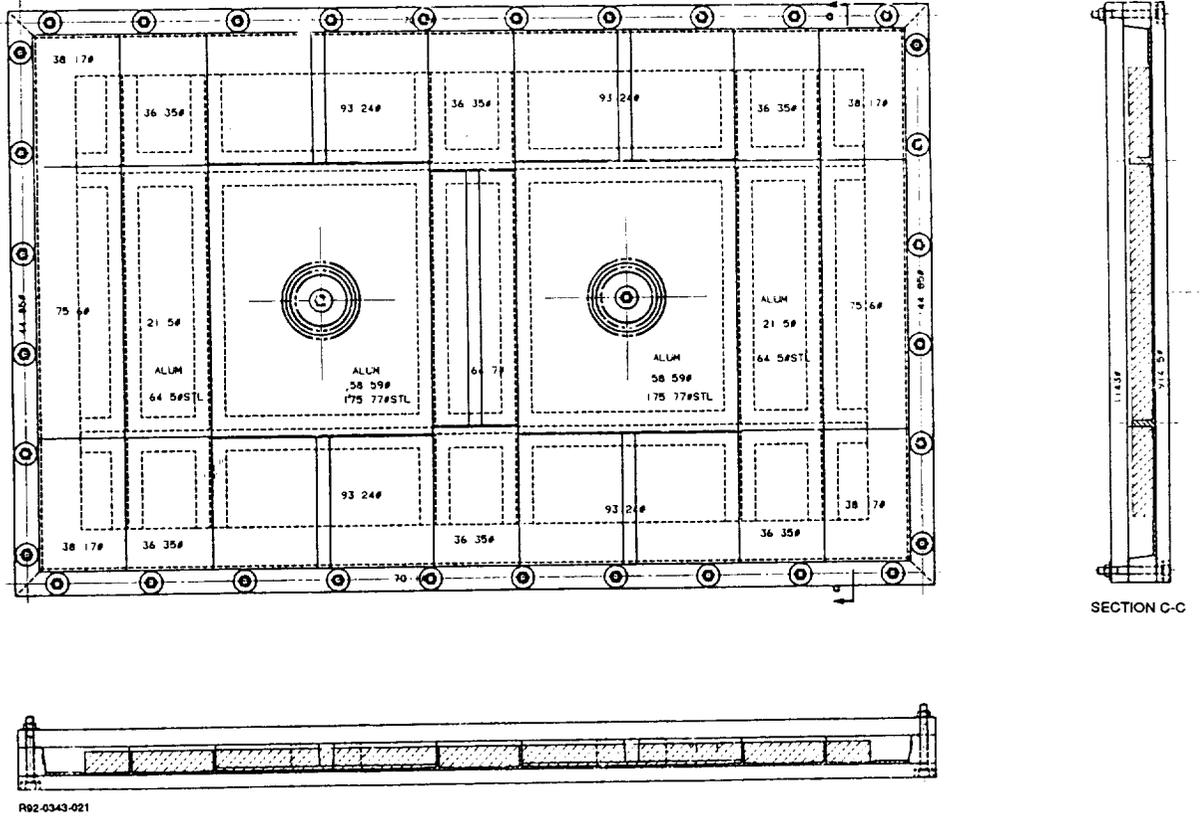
Tooling design concept, window belt subcomponent drawing D19B1865-11BOF .
